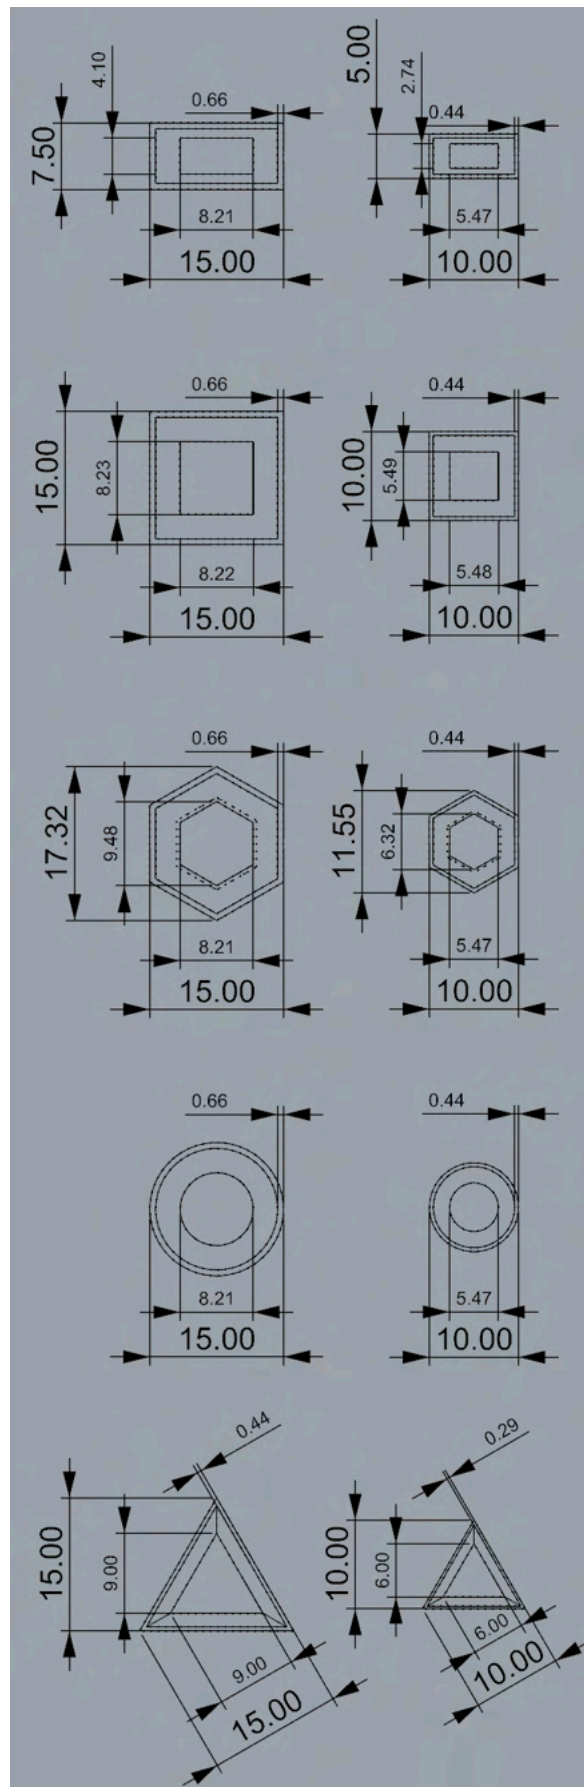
Technical drawing and measurements of shapes with hinged grooves
